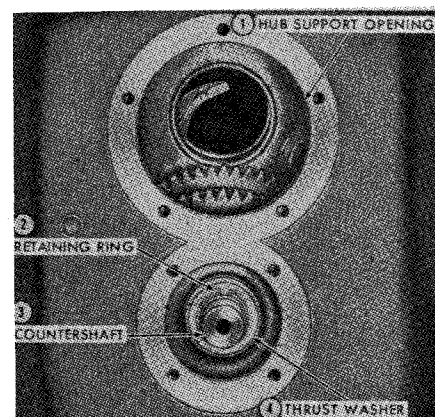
View showing front end of transmission with mainshaft and main countershaft bearing retainer removed.
